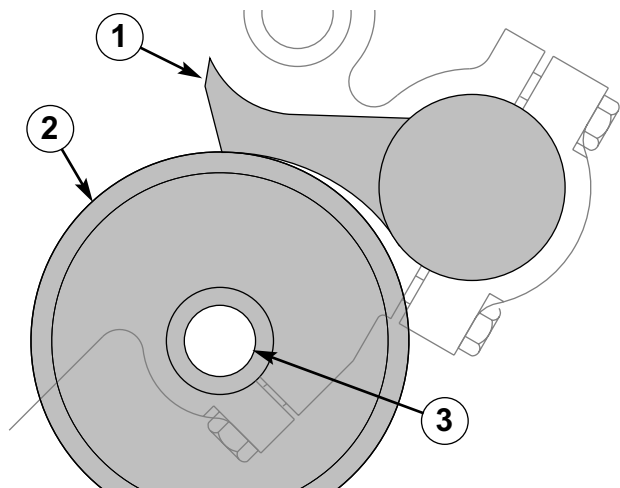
Setting clearance between crosscut knife spindle and shear plate using clearance gauge.
